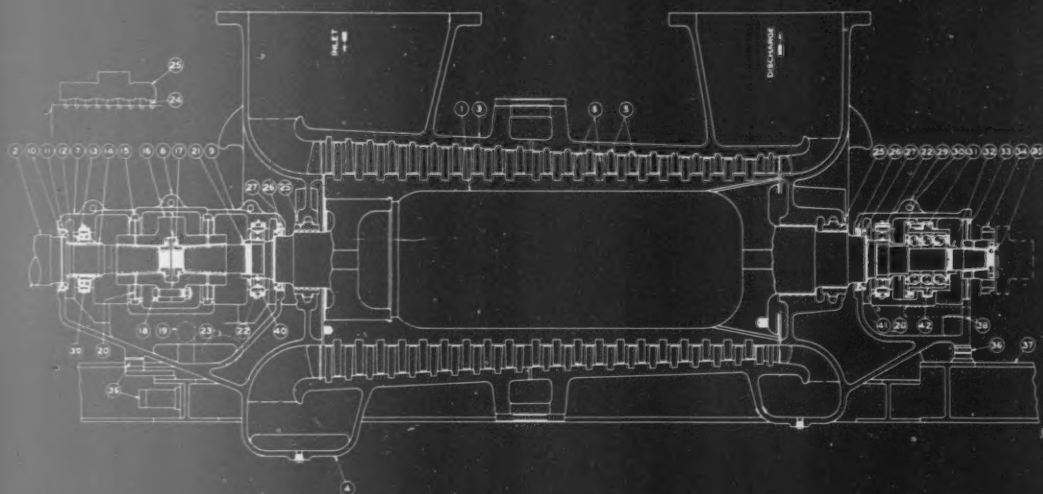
Section through Axial Compressor of 40,000 Cfm Unit.
